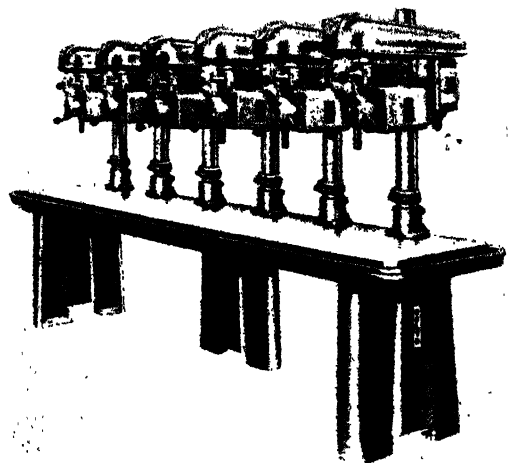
A Delta multiple-spindle industrial drill press setup. This unit must be anchored.
